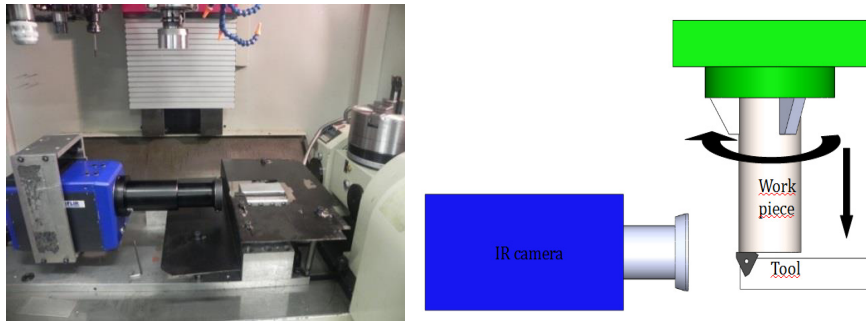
Experimental setup of fundamental cutting test in finishing turning.
